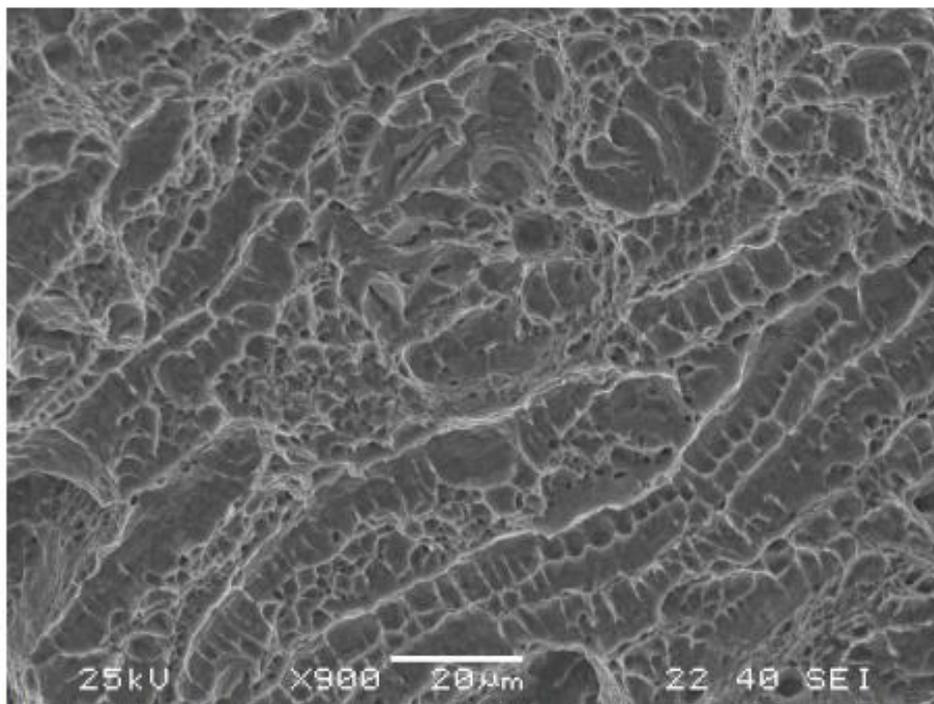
Idler gear shaft fracture surface woody texture region under SEM contains evidence of ductile overload.
